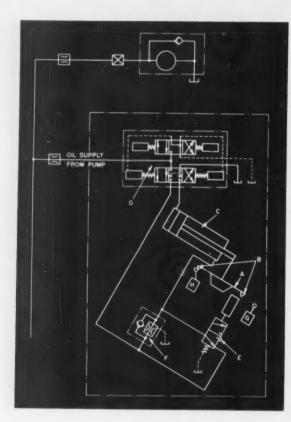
Basic hydraulically operated, electrically controlled circuit which is frequently employed for various purposes on transfer machines. In this case, cylinder (C) feeds machining unit along slide (A).
